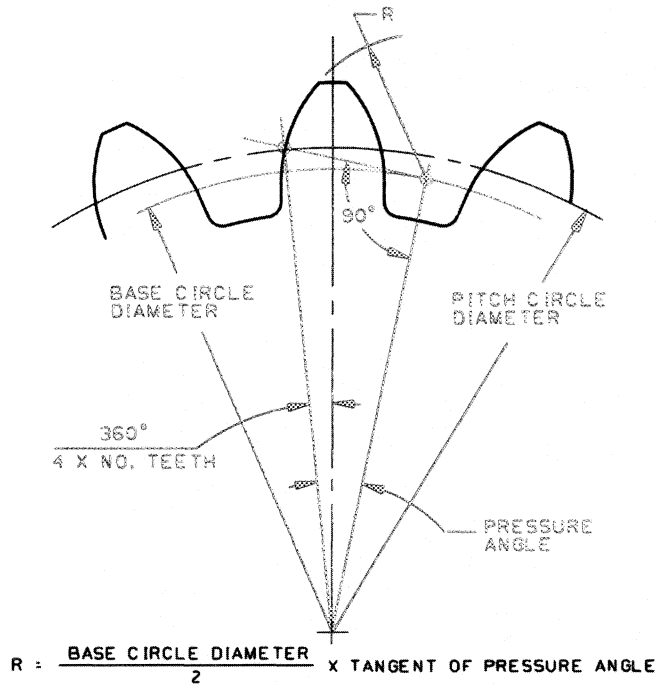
Drawing an Approximate Involute for Construction of Gear Teeth
